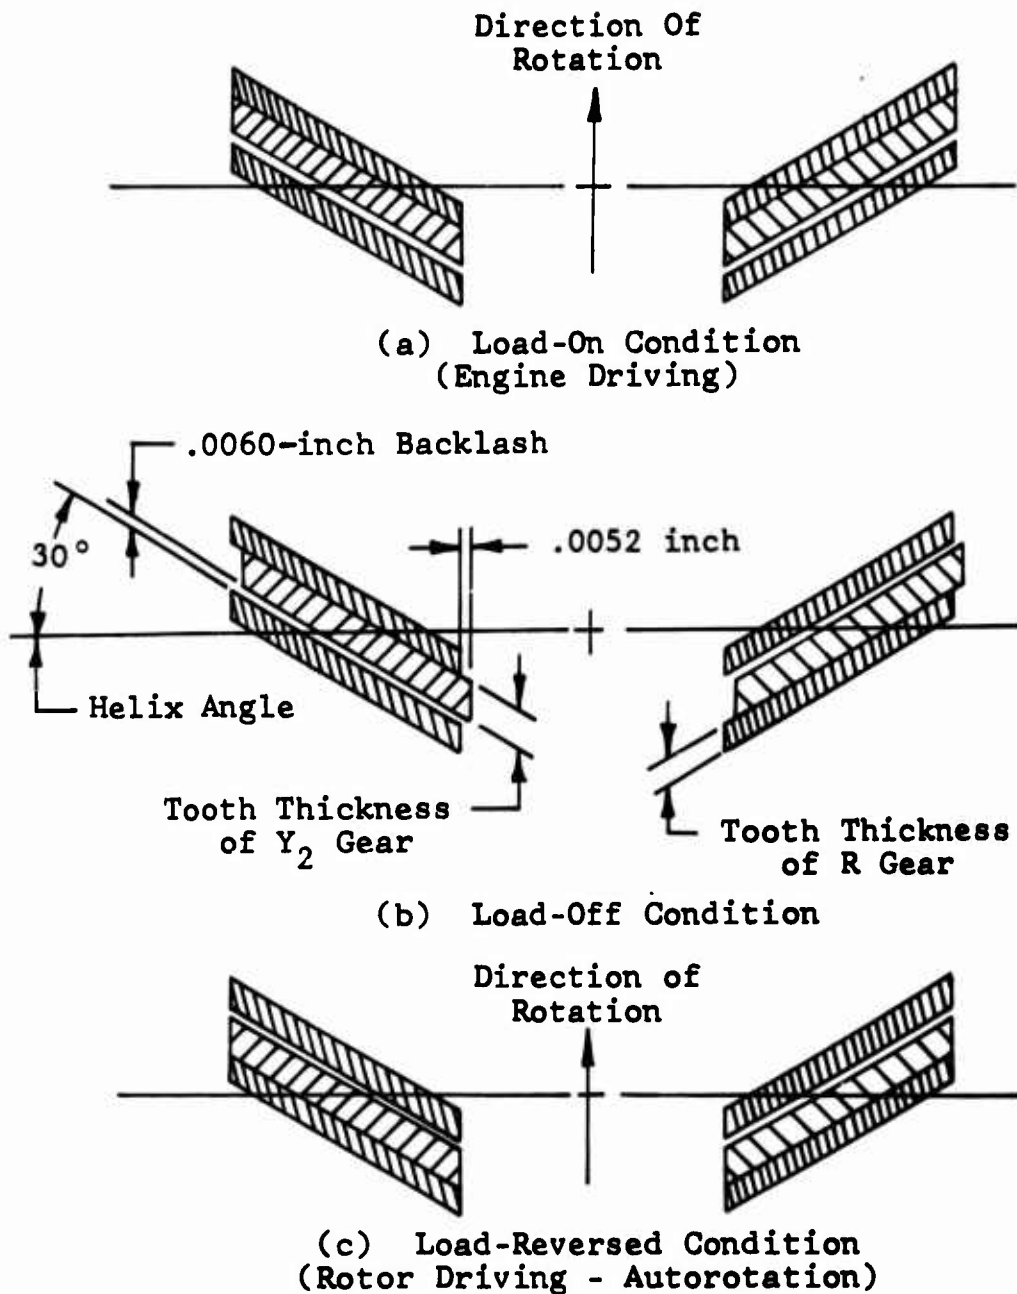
Axial Position of Y₂ Gear Relative to Ring Gear During Loaded, Unloaded, and Reverse Loaded Conditions With Ring Gear Fixed Axially. (Sections are Taken From Along the Pitch Circles and Show One Y₂ Gear Tooth Meshing Between Two Ring Gear Teeth.)
